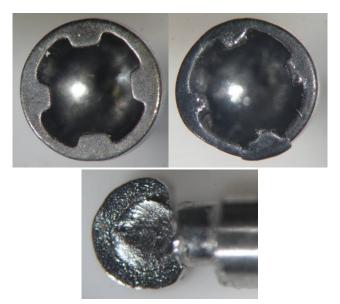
Interior details of the BHS driver coated with DHC without testing (left), after testing (right) and breakage surface of the upper part of the driver (bottom).
